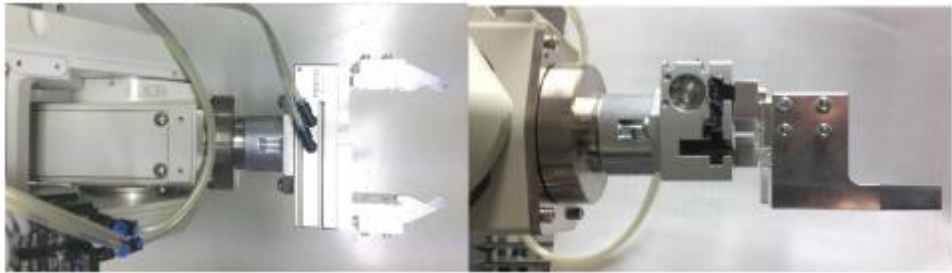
PNEUMATIC GRIPPER (TOOL)
